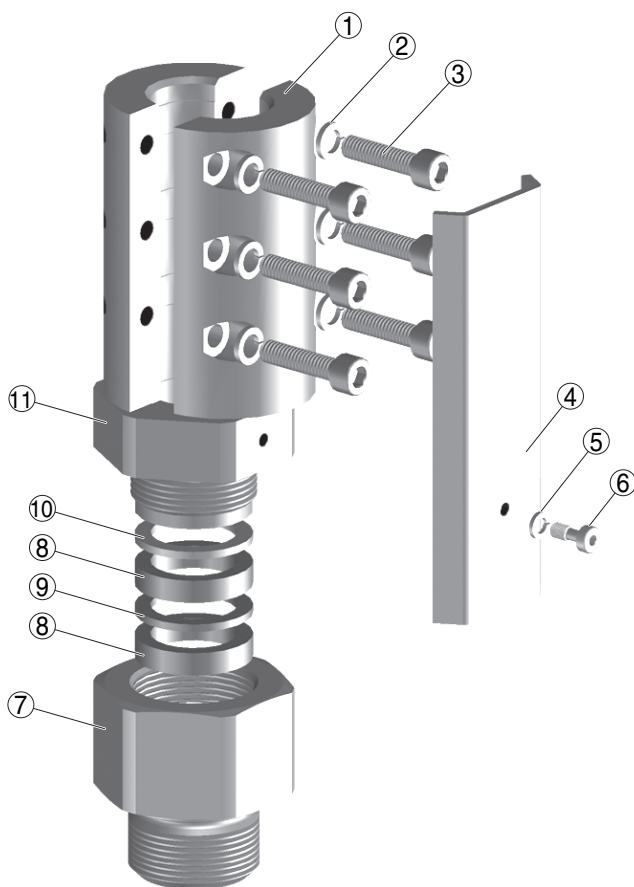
ARV-TF633.C - up to 64 bar (928 psi)
